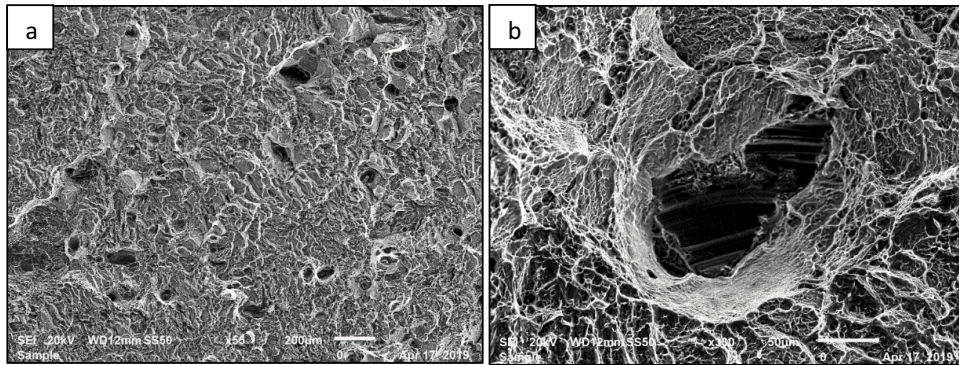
SEM images of the tensile fracture surface a) Pores b) Dimples
